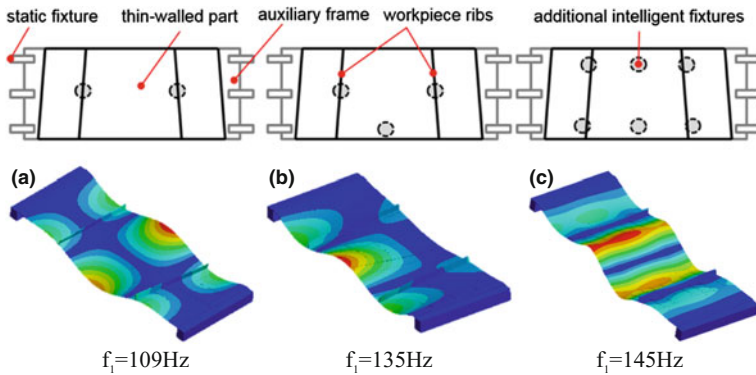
Three clamping configurations: (a) with two additional fixtures; (b) with three additional fixtures; (c) with six additional fixtures. Workpiece first eigenvalues and related eigenmodes after clamping are shown
